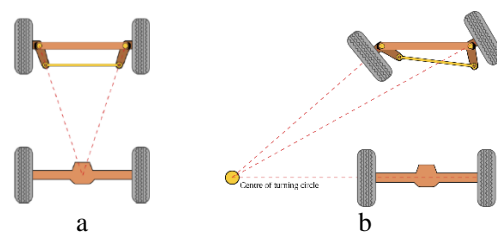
Ackerman Steering System, Steering System (a), Steering Wheel (b)
